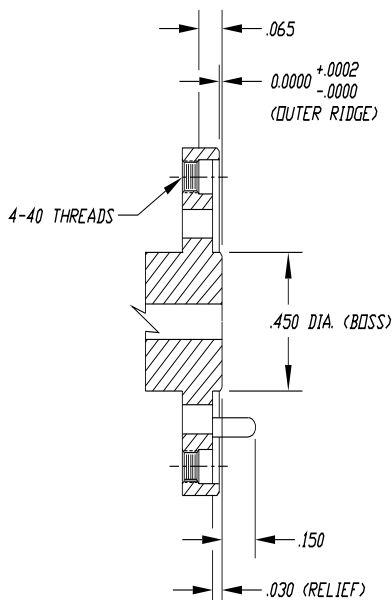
Side view (typical) of the MPF22A and MPF19A flanges.
